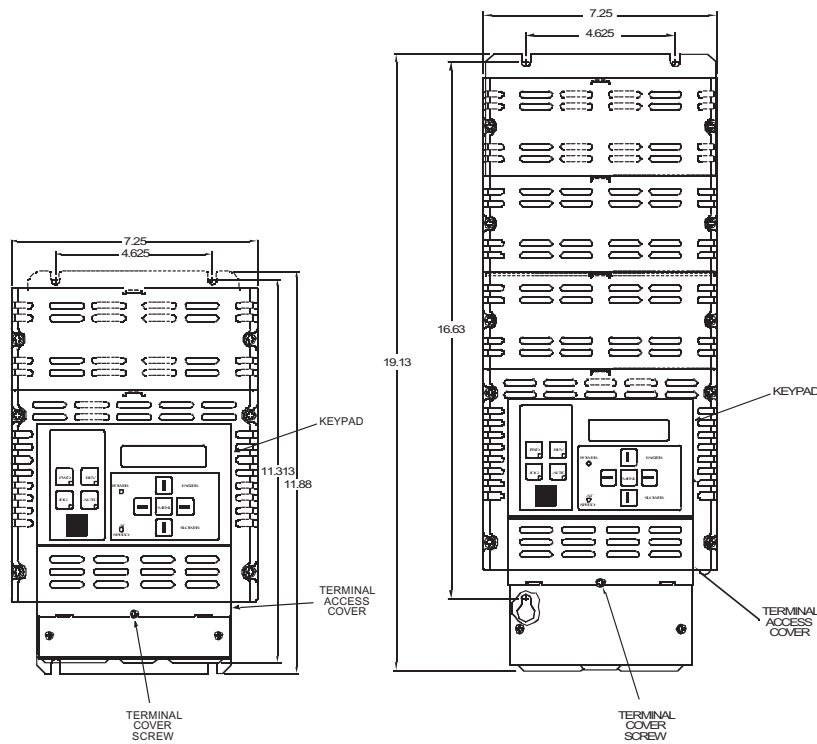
ADX CONTROLLER MOUNTING DIMENSIONS, 7-1/2 - 20HP, 230/460V
